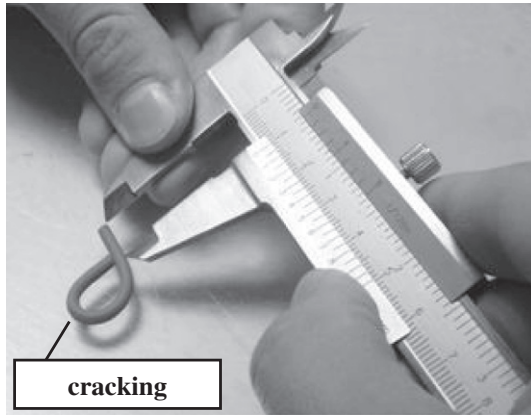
Tip distance measurement of a very flexible thread with a caliper just after cracking.
